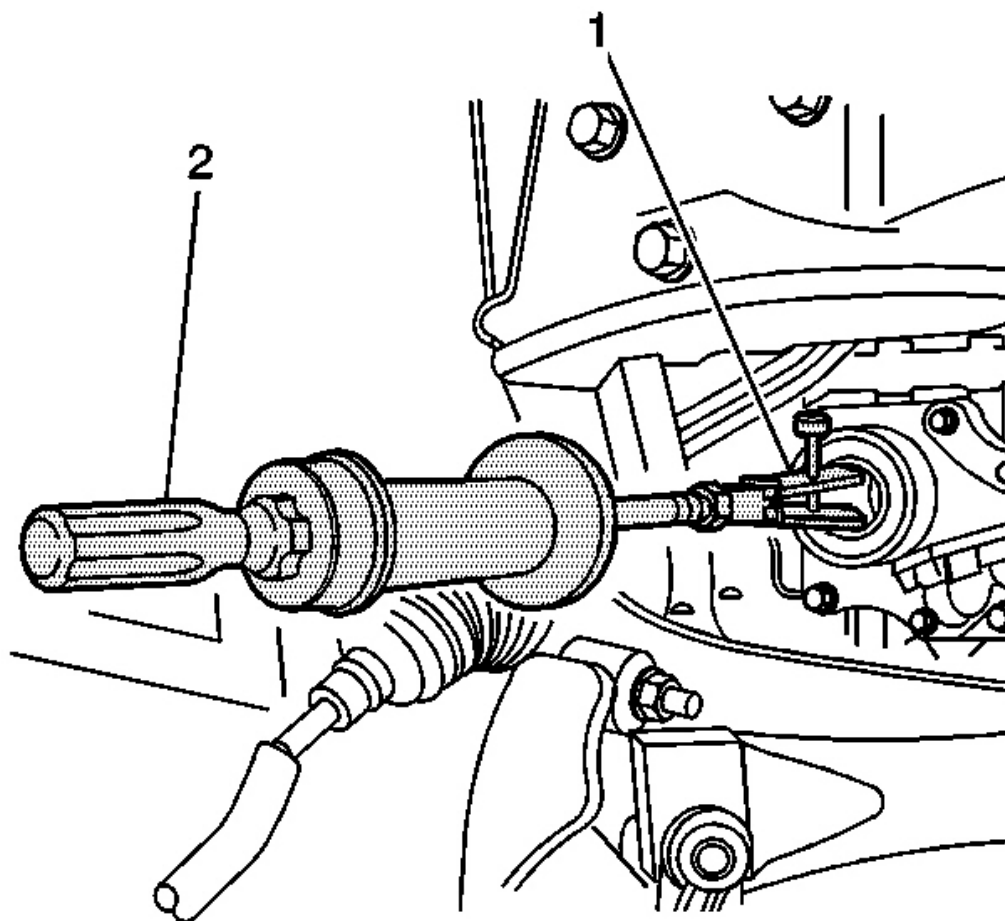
Identifying Special Tools J 29369-2 & J 6125-B
